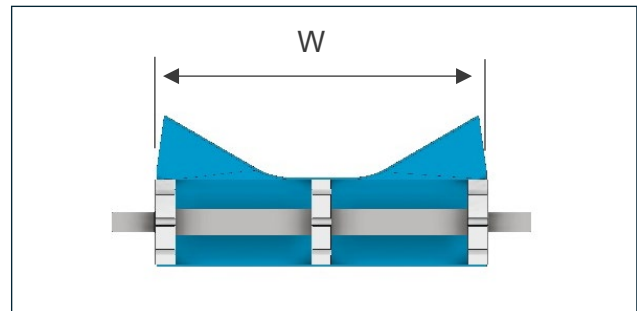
TROUGH CONVEYOR FRONTAL SIDE
